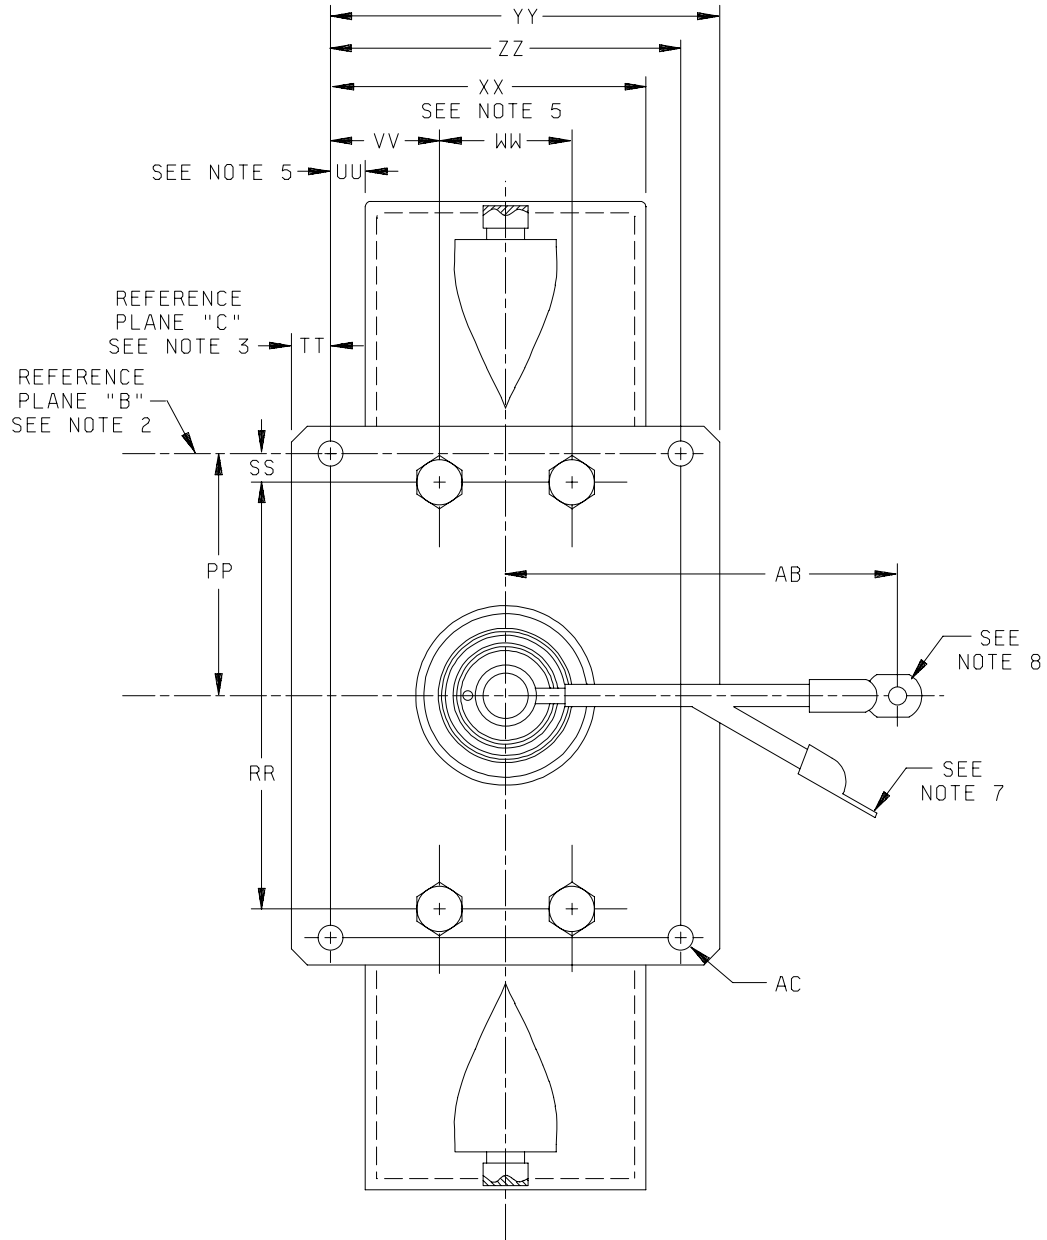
Outline dimensions of tube type 6344A. -Continued.
